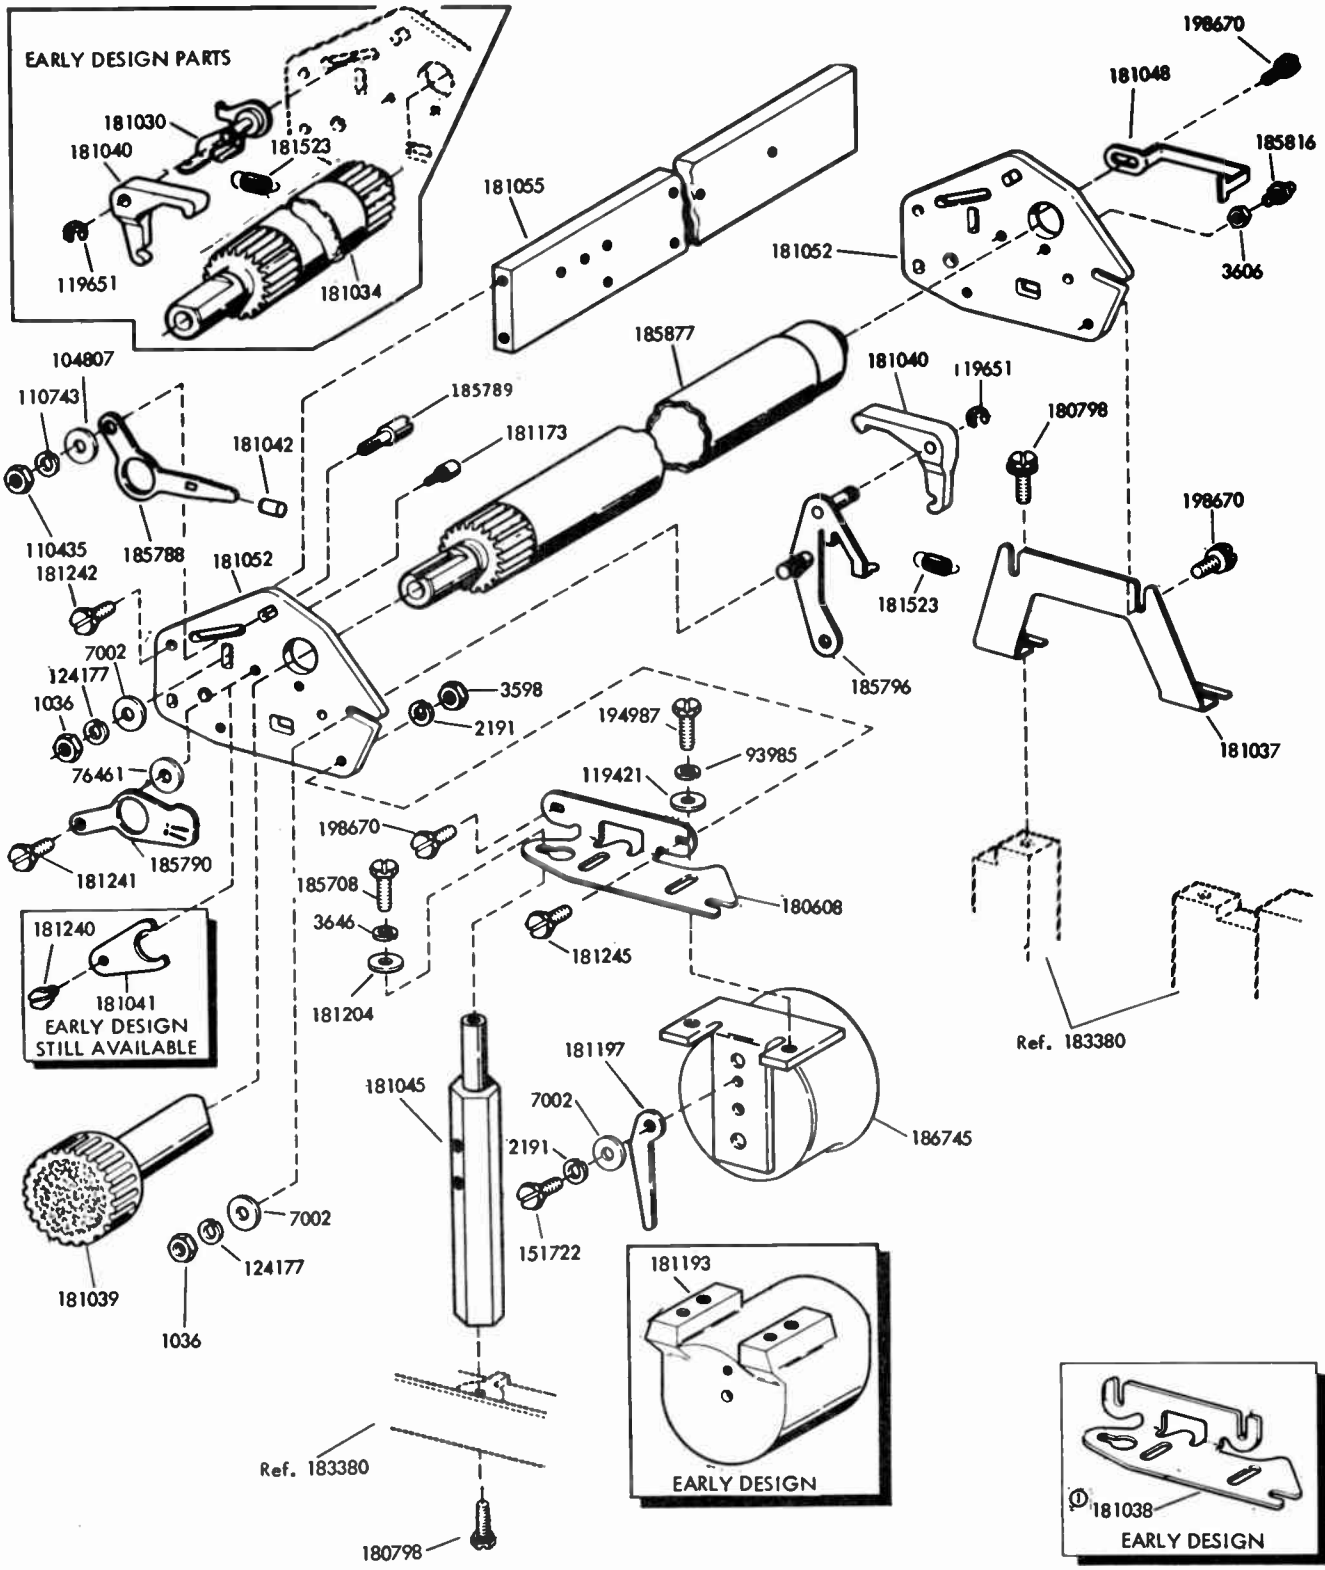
PLATEN MECHANISM - FRICTION FEED
